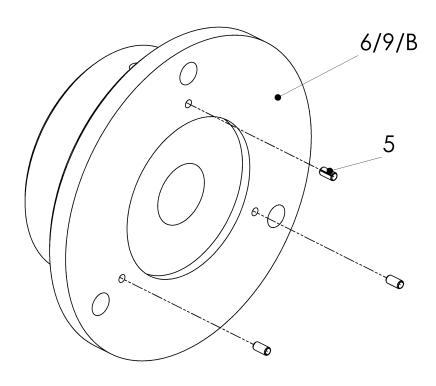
Prepare the hub/adapter/flange (6/9/B) for mounting (Type 008A-00016..00600-.N..)
